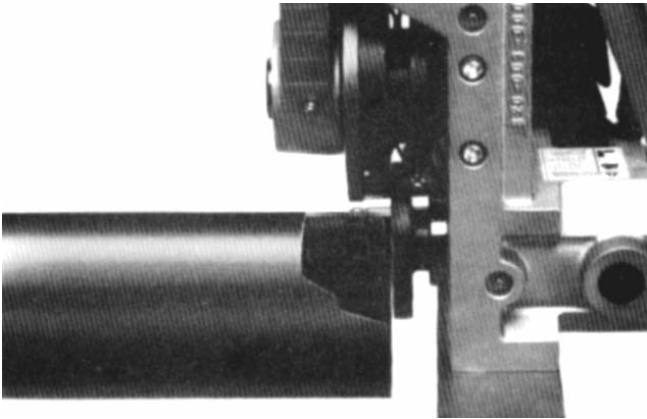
Squaring Pipe up against Flange of Drive Roll
